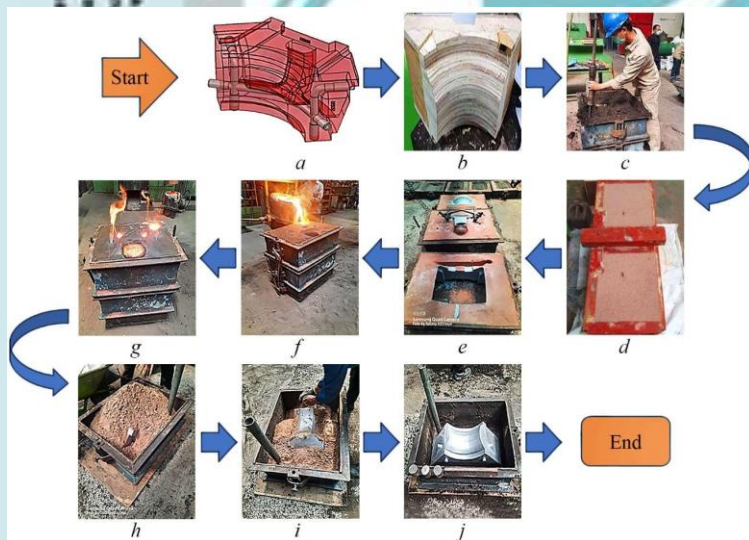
Stages of side core mold manufacturing process: a – project design; b – Pola/Patten; c – die manufacture; d – core manufacture; e – furnace preparation; f – casting; g – solidification; h – sand mold disassembly; i – visual check; j – finishing side core
